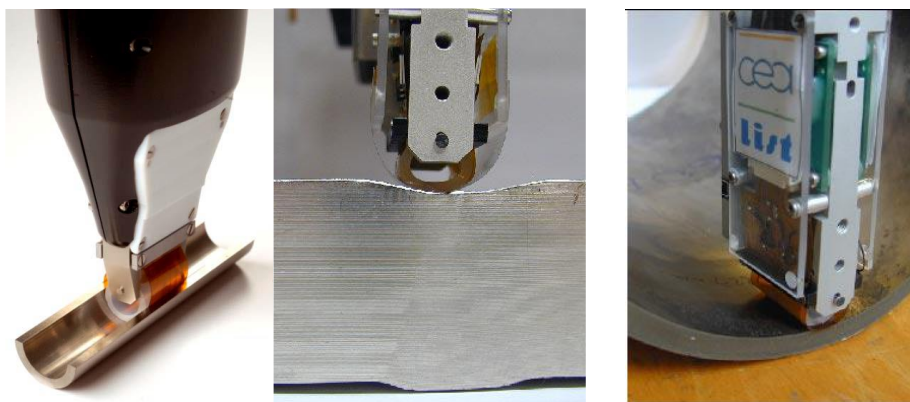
Flexible EC probe prototypes for complex shape inspection [175], [176]
